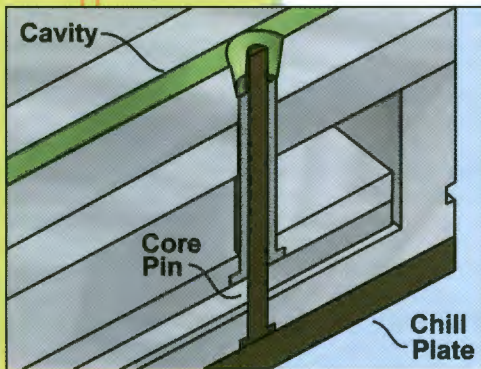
Illustration A: Core pin forming a hole in the plastic part. The core pin transfers heat to a chill plate for faster cooling cycles.
